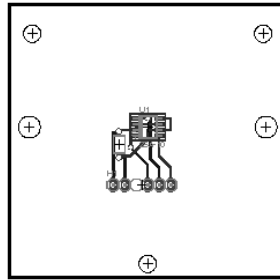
Printed circuit board for the 2SA-10 angle sensor. The primary purpose of this board is alignment with the pendulum axle.
